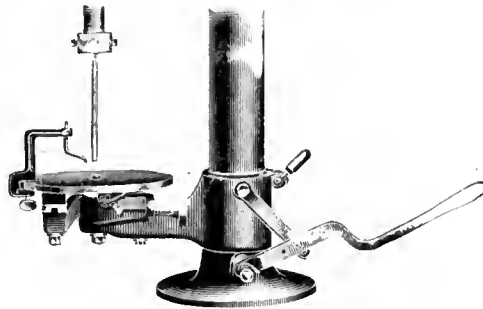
TABLE LOWERED FOR REMOVING WORK
